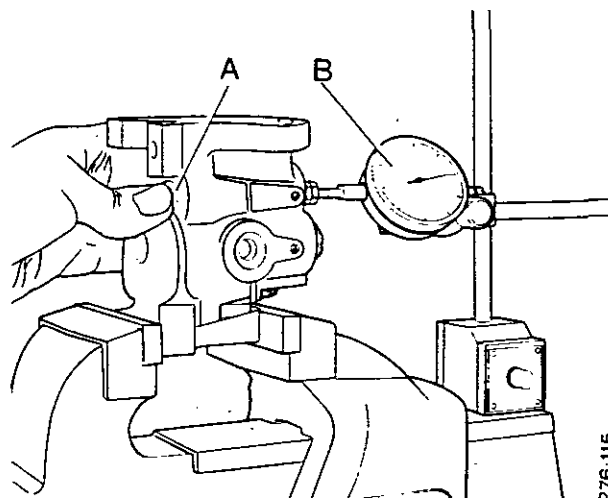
ADJUSTMENT OF THE SPOOL VALVE
